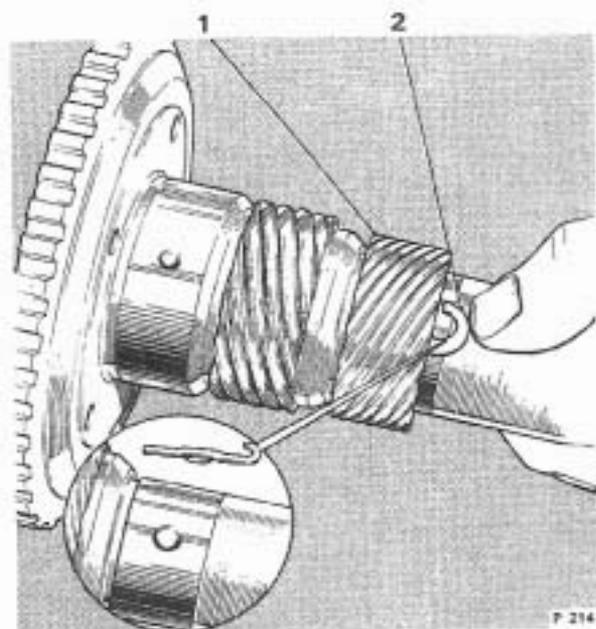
REMOVING NYLON SPEEDOMETER DRIVE GEAR
